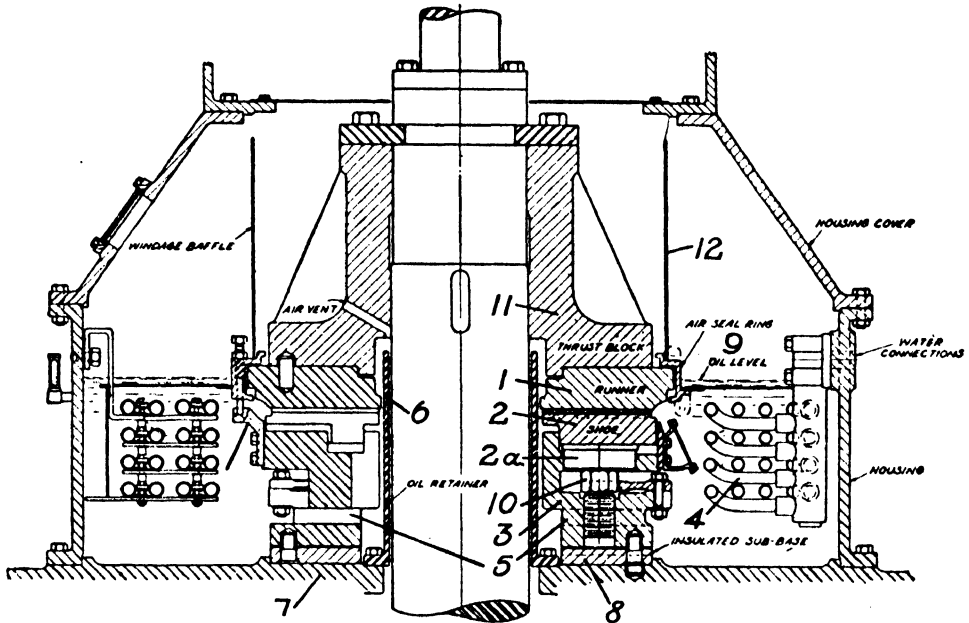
Thrust bearing for hydraulic turbine and generator, by Kingsbury Machine Works, Inc., Philadelphia
